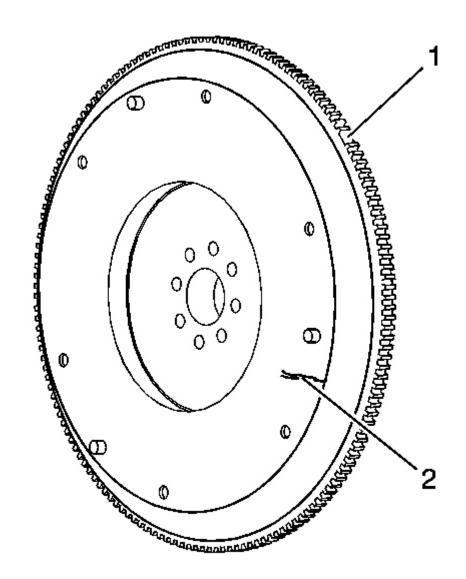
Inspecting Engine Flywheel For Damage - Manual Transmission Courtesy of GENERAL MOTORS CORP.
